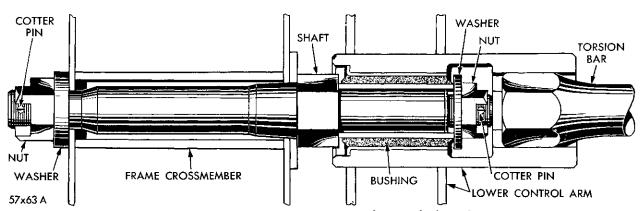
Removing Lower Control Arm Shaft and Bushing from Housing (Typical)
